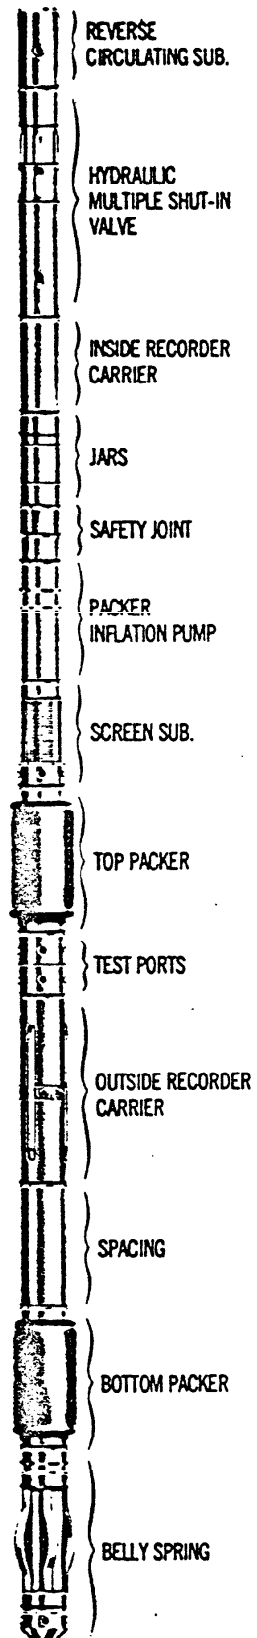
Inflatable straddle packer tool for conventional drill-stem tests. (Courtesy Lynes, Inc., Houston, Texas)
